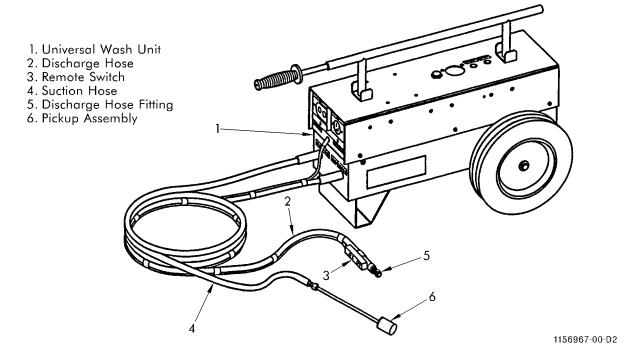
Universal Wash Unit 21C2438G01; Compressor Cleaning
